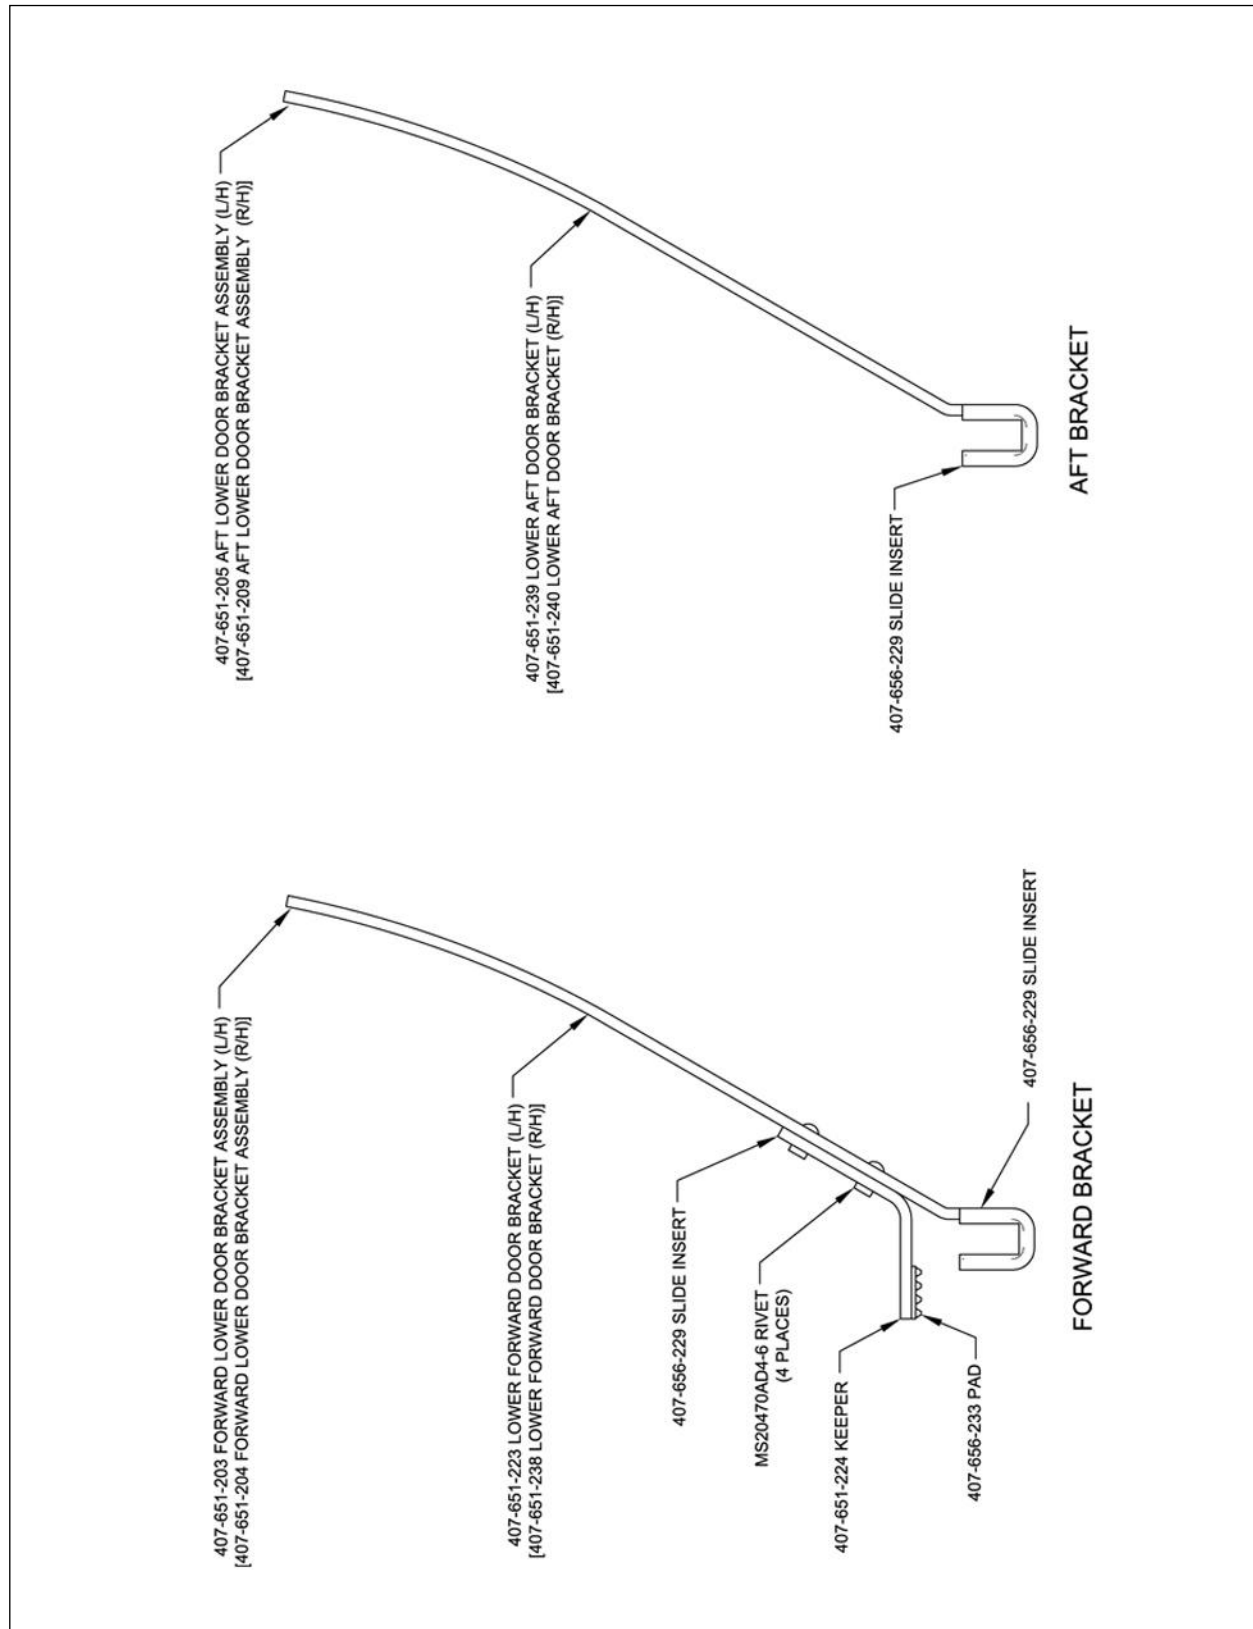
LOWER DOOR BRACKET ASSEMBLIES
